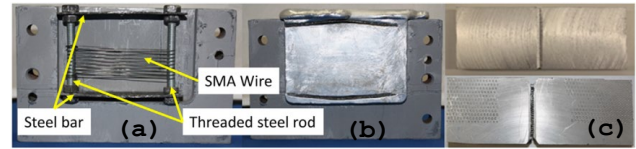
(a) A customized steel frame for wire winding with nitinol wires; (b) cast self-healing structures; and (c) cracked sample under tensile loading.²⁰
